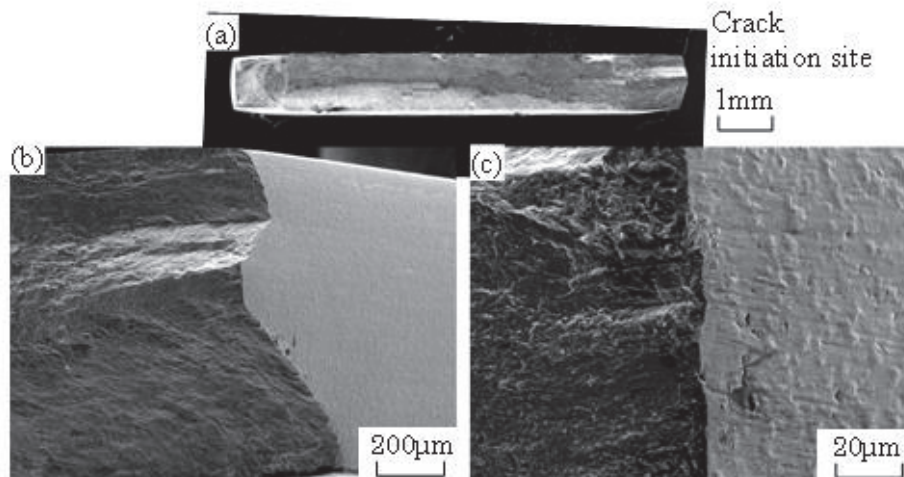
Fatigue fracture surfaces of MDFed Ti in laboratory air (Surface crack initiation): (a) Overview, (b) and (c) Magnified views at the crack initiation site ($\sigma_a = 270\text{MPa}$, $N_f = 6.5 \times 10^5$, Lot B).
